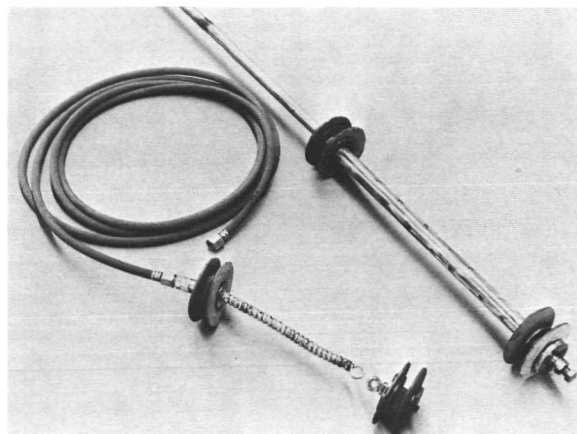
Internal shielding devices for protecting the root sides of pipe welds.
